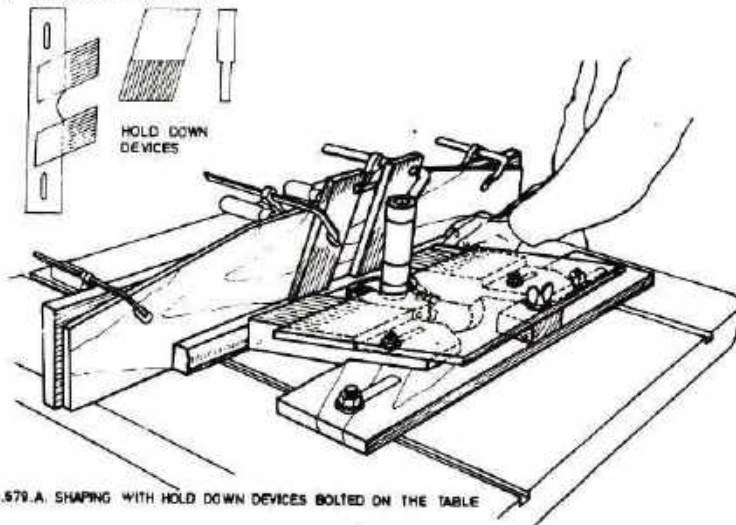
A. SHAPING WITH HOLD DOWN DEVICES BOLTED ON THE TABLE
